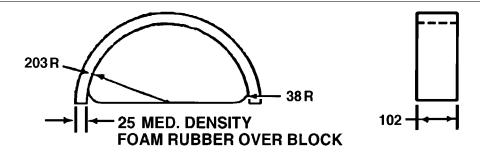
Body Block for Combination Shoulder and Lap Belt Anchorage All dimensions in millimeters (mm)
